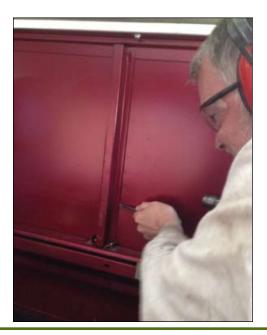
sees Kevin cutting out the lines as me marked them. Tolerance is minimal, so we cut the centre of the line, figuring we could file any tight spots, which we had to.
